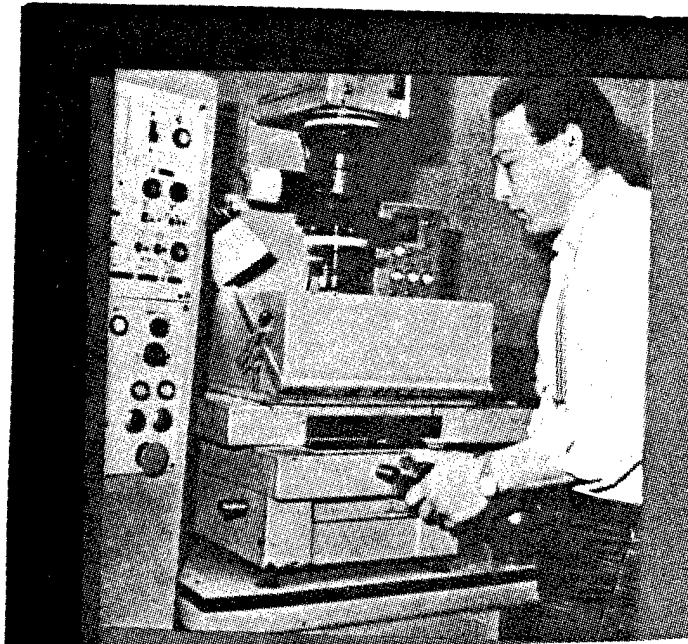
Model 4B611 machine tool designed for removing a broken tool or fixture from expensive products. The electrode-tool in the shape of a copper tube forms a ring cavity around a stuck fragment of a drill or tap, without touching the wall of the hole. The fragment is then removed easily.
